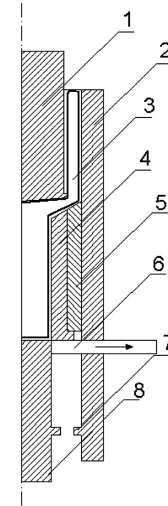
The scheme of applied solution - the combined of cutting sleeve from movable ring and from blockade as well as the use of immovable blockade: 1-punch, 2-container, 3-perform, 4-movable ring, 5-cutting sleeve, 6-movable blocking, 7-immovable blocking, 8-knock-out
